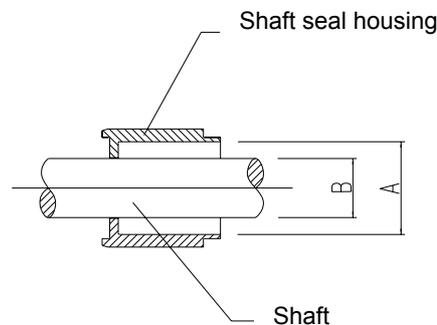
The A and B dimensions on the shaft and the shaft seal housing
